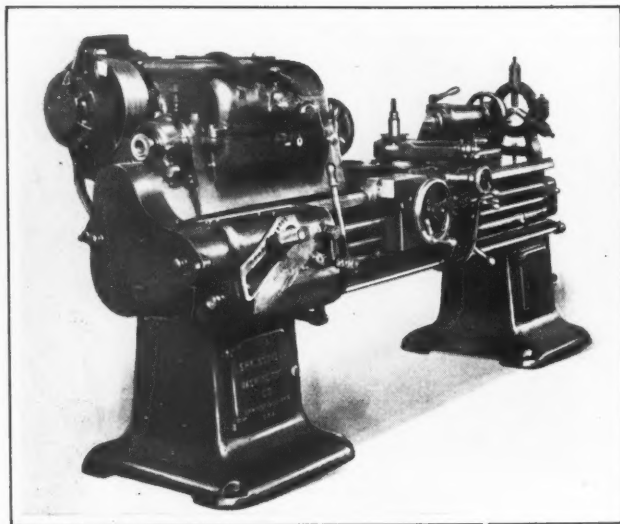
Springfield Lathe designed for Use in Tool-rooms and Manufacturing Departments
